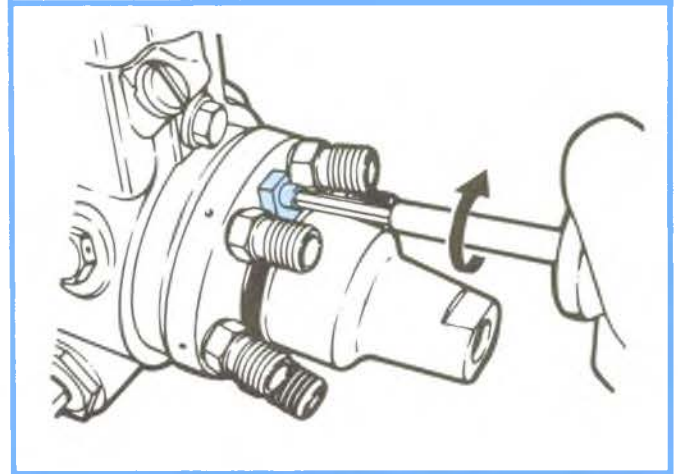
, Installing End Cap Locking Plate, Seal and Screw.
